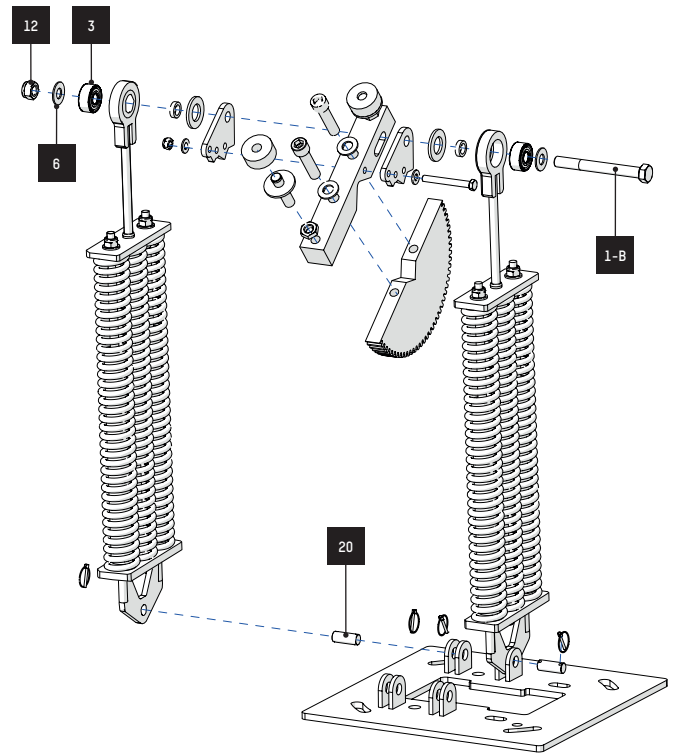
Installation of a spring assembly (4 to 6 springs)
